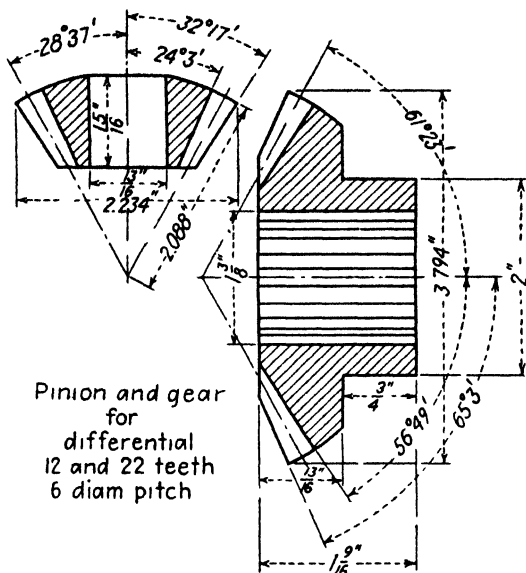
PINION AND SIDE GEAR OF CALCULATED DIFFERENTIAL.
